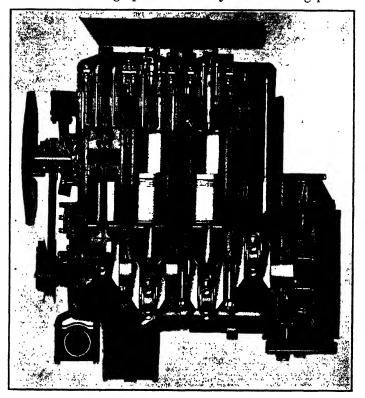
THE DENNIS FOUR-CYLINDER ENGINE WITH*CAVITY PISTON COMBUSTION CHAMBER
